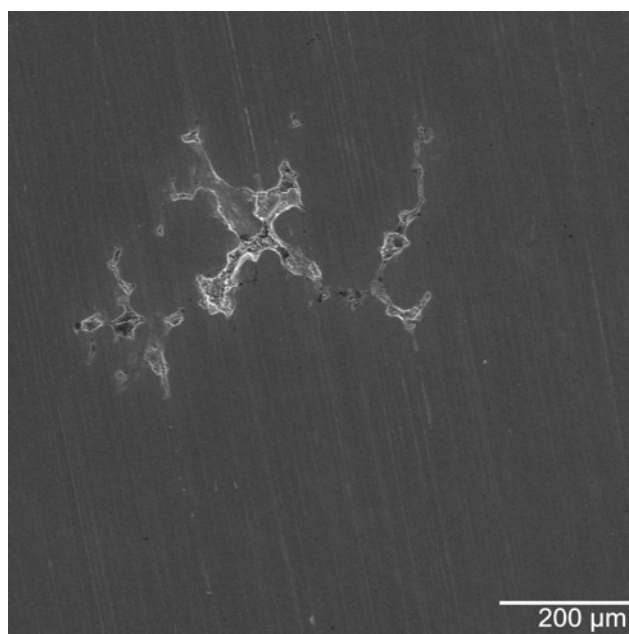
Magnified View of Macroporosity in a Straight Cylinder Specimen with the Fracture Surface Ground Back (Specimen B7)
